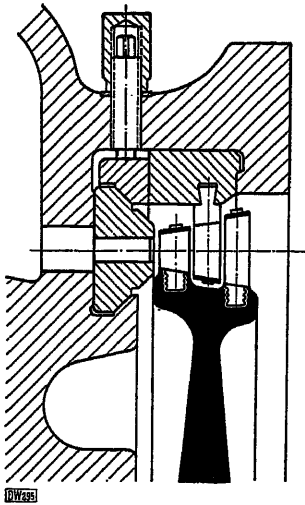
B.B.C.*, method of fixing nozzle and guide blade segments to the casing
